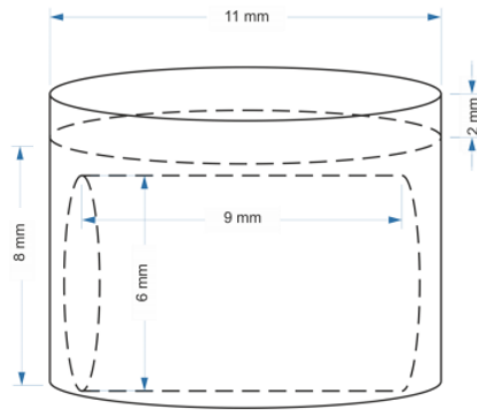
Drawing of 11 mm diameter x 10 mm height pellet [9].
